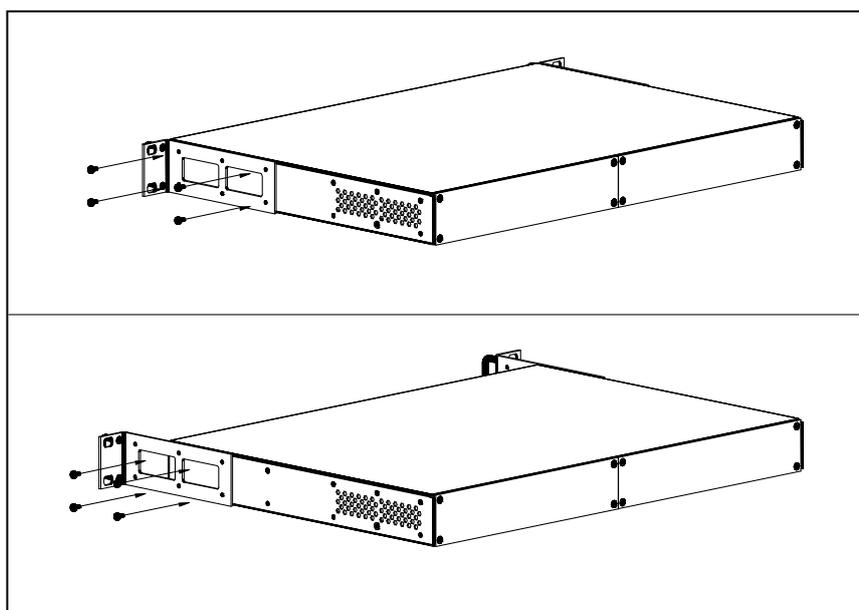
ProDAQ 5720 Rear Rack-mount Options
